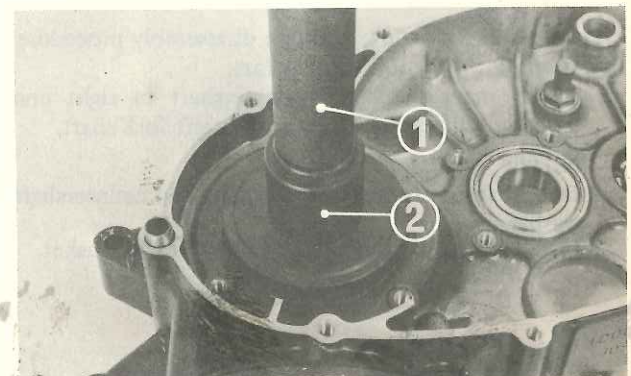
(1) Driver handle (2) Crankshaft bearing driver attachment
